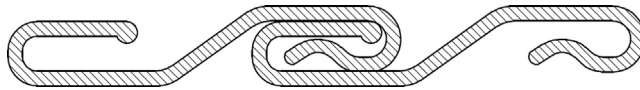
Typical cross section of an unbonded flexible pipe.
